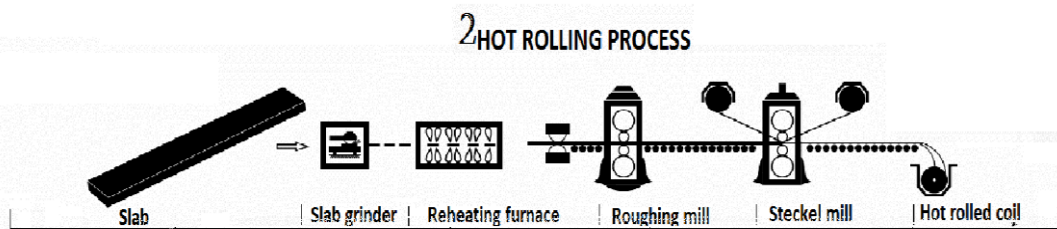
Typical steel reverse hot rolling mill for stainless steel.
